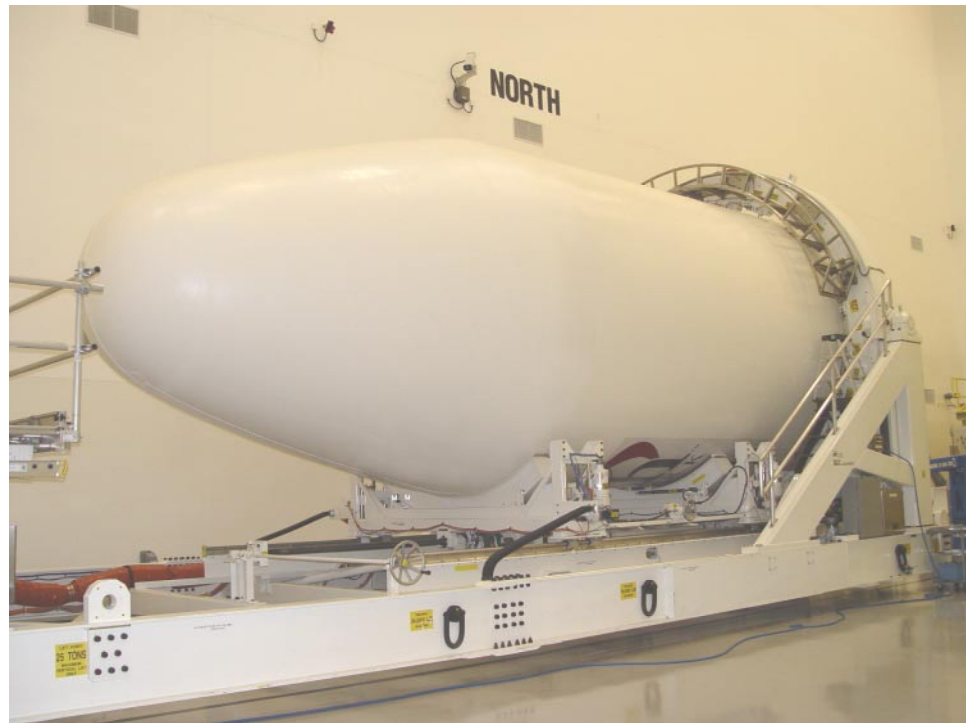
Strongback Assembly Rotating to Horizontal With Pathfinder Structure
